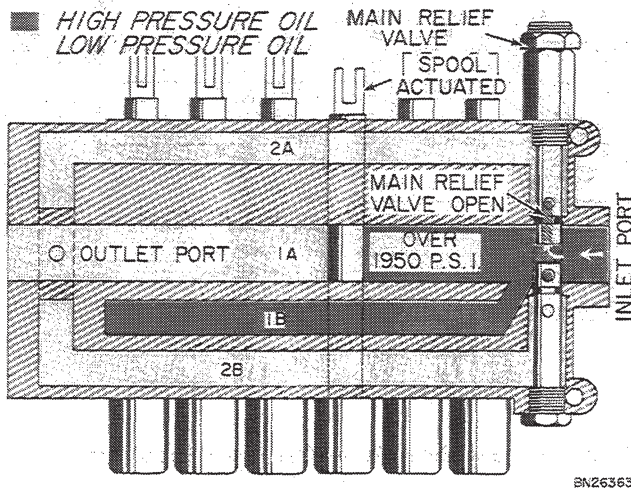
Backhoe Valve - Main Relief Valve Circuit
